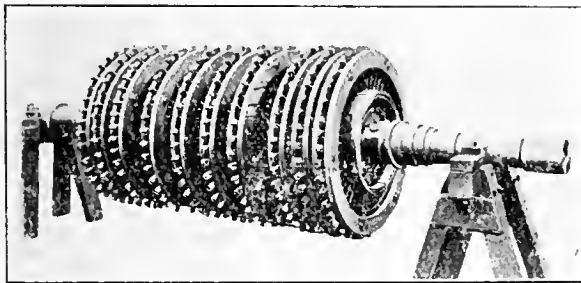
PRESSING GEAR IN POSITION ON 5,000-KW. ROTOR.
